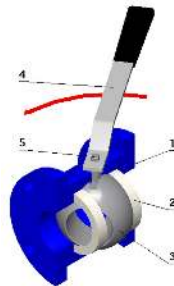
1) Body 2) Head 3) Ball 4) Lever handle 5) Stem - Image by Ruben Castelnuovo licensed under [CC BY-SA 3.0](#)
